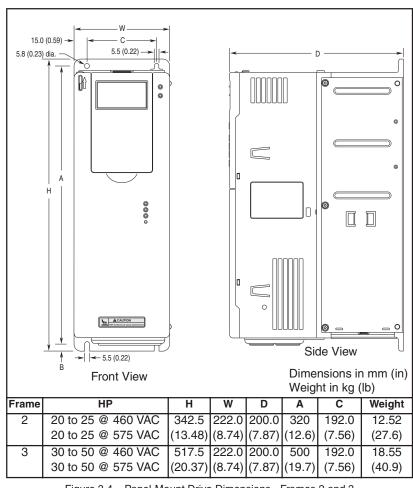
Panel-Mount Drive Dimensions - Frames 2 and 3  $\,$
